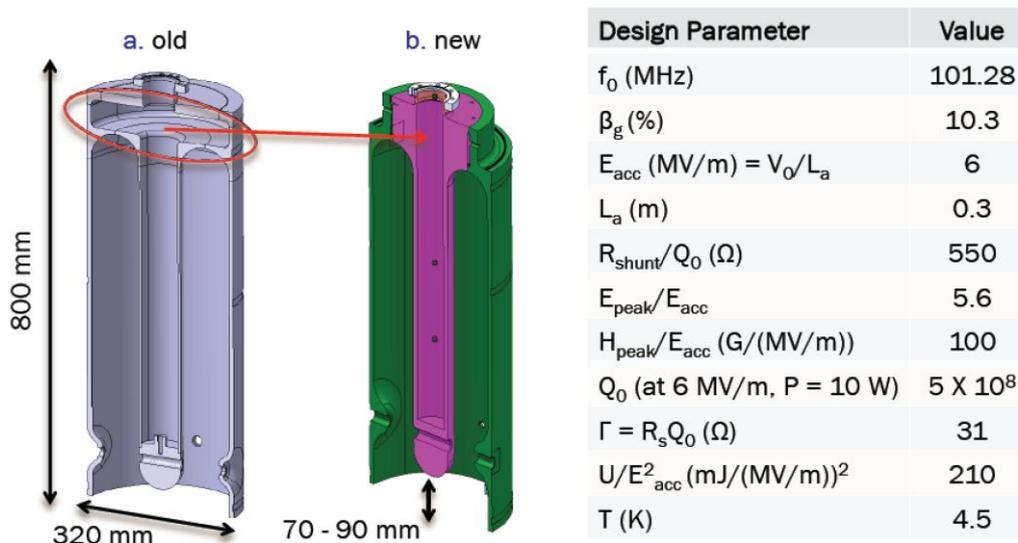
HIE-ISOLDE high-beta Copper substrates: left) rolled and welded prototype; right) bulk machined prototype (inner conductor shown in magenta);
